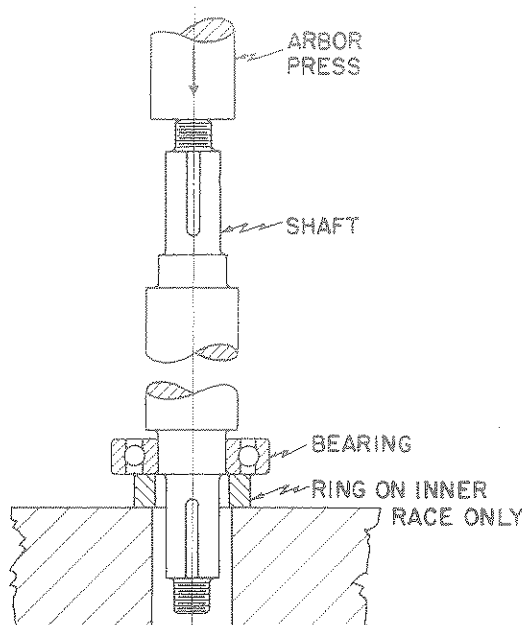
One Method of Mounting an Anti-Friction Bearing on a Shaft
